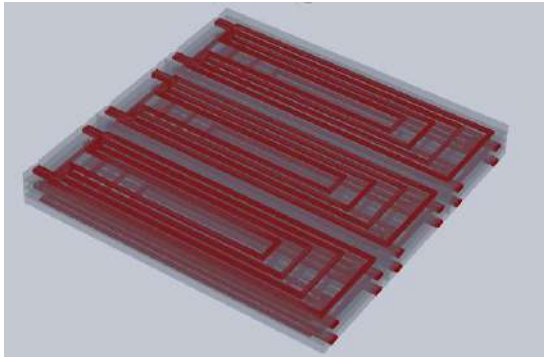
Suggested multi-assembly to get 3-dimensional wear profile.
